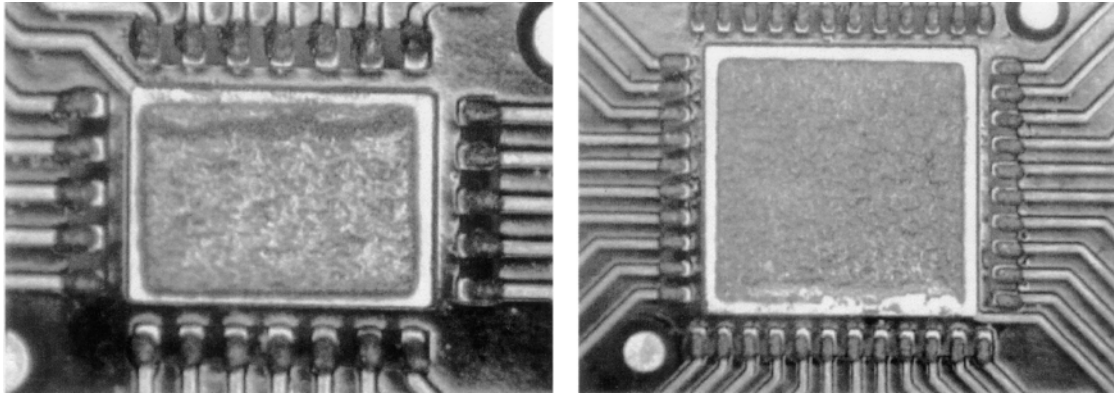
Solder Paste Printing of LLP 24 and LLP 44 Using 127µm (5 mil) Thick Stencil
